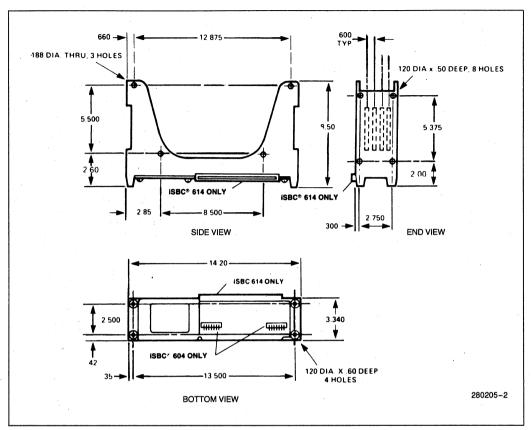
iSBC® 604/614 Cardcage Assembly Dimensions
